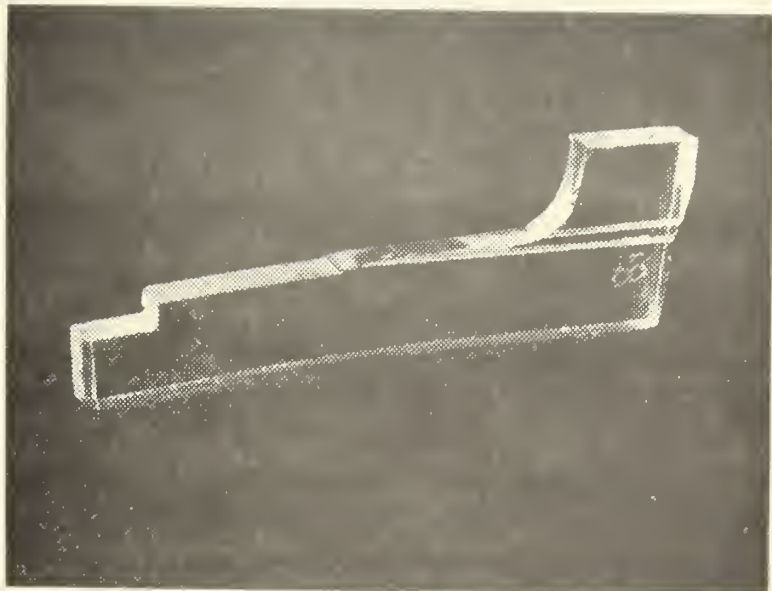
The remainder of the Type I specimens fractured in the manner shown.
